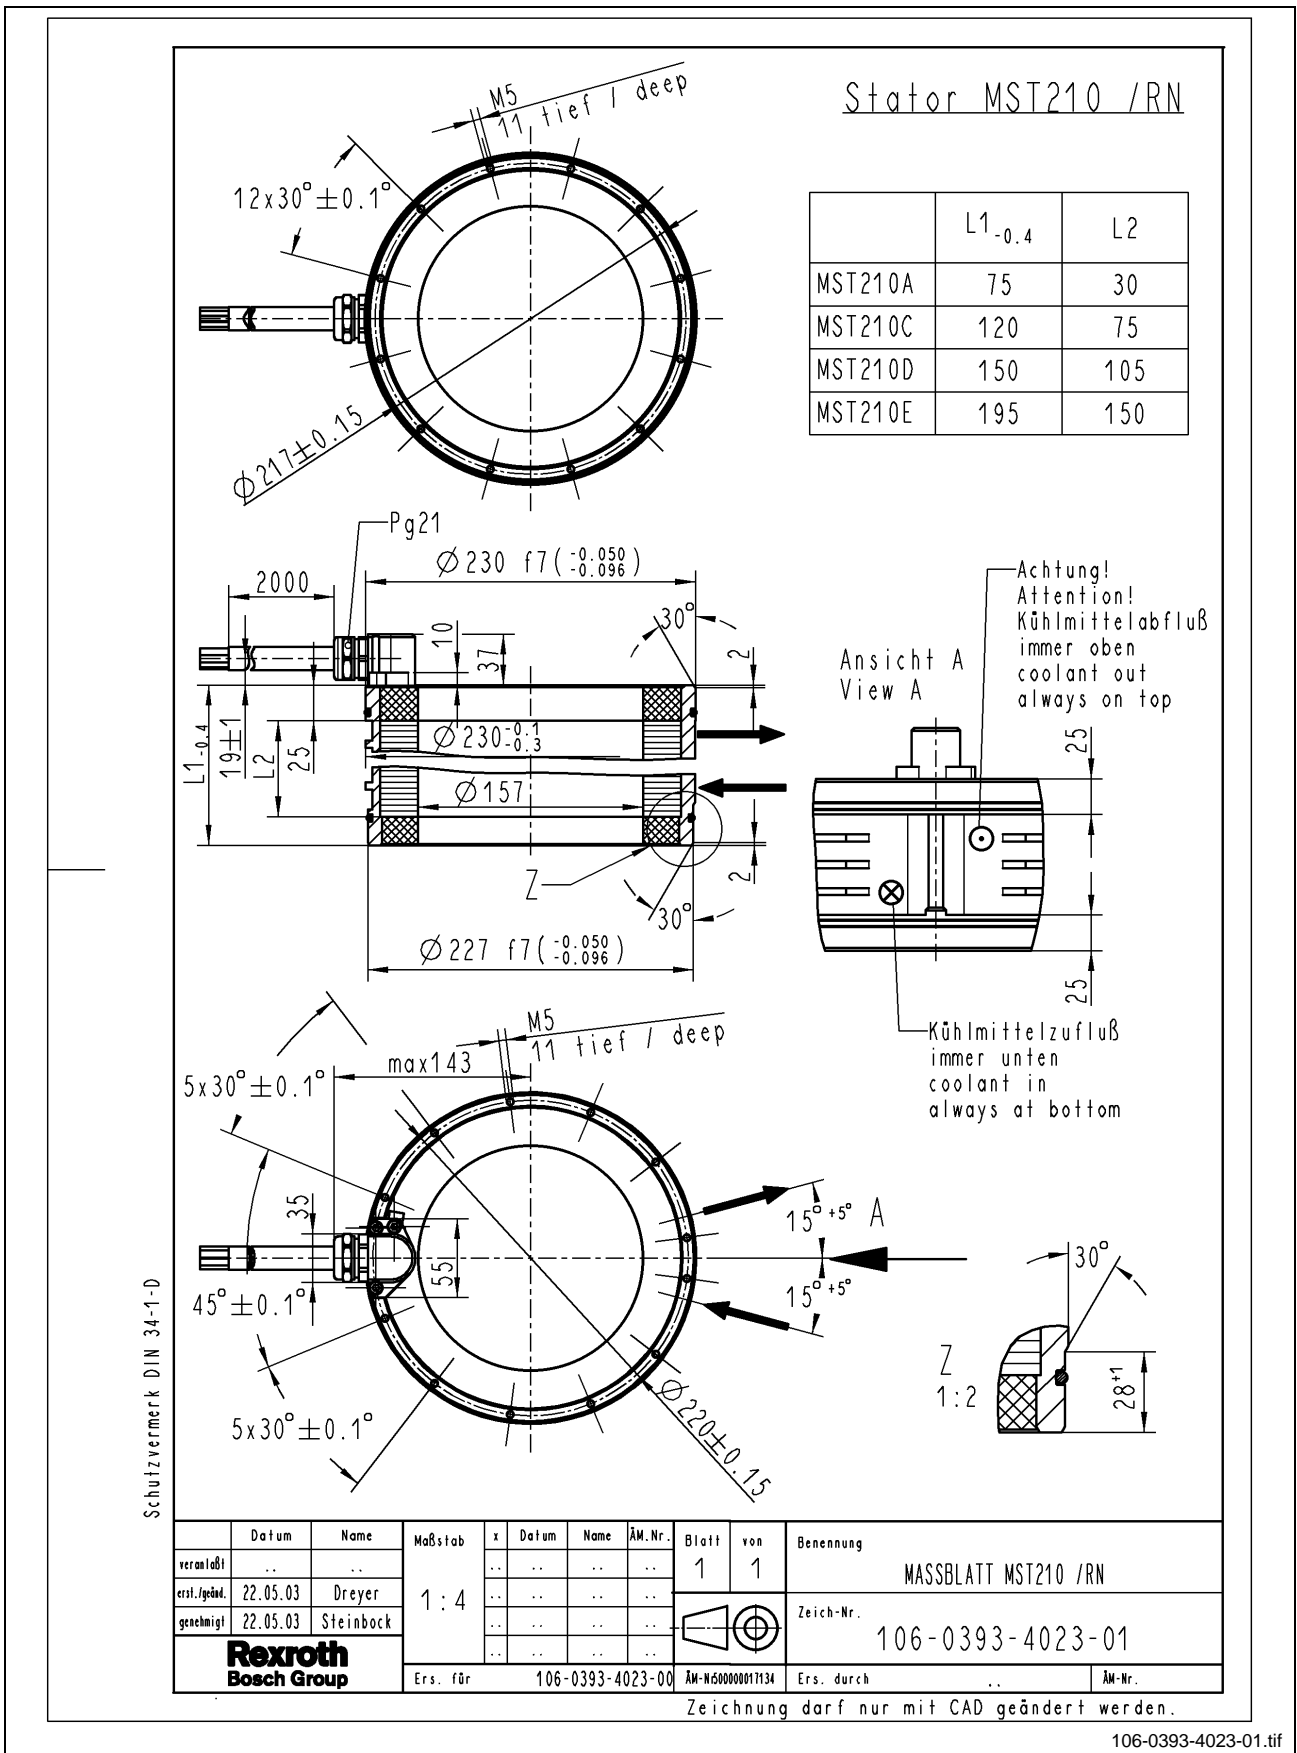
Dimension sheet MST210, electrical connection "RN"
